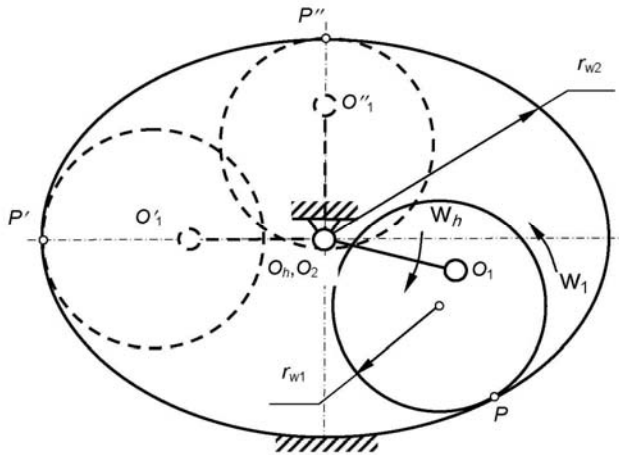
Model of a planetary toothed mechanism with non-circle ram machined wheels
